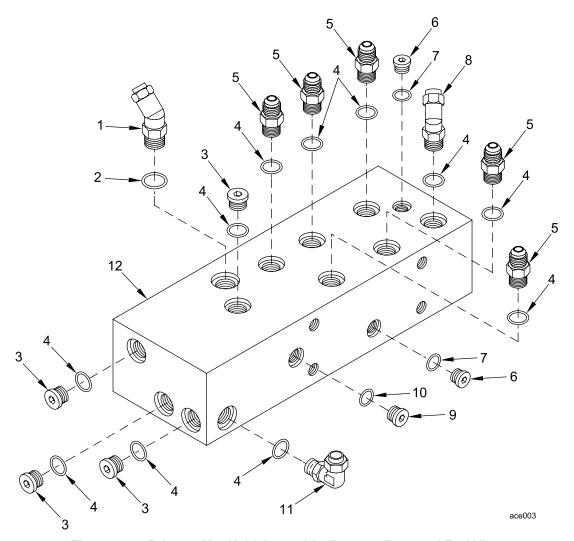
Primary Manifold Assembly, Bottom, Rear and End View
